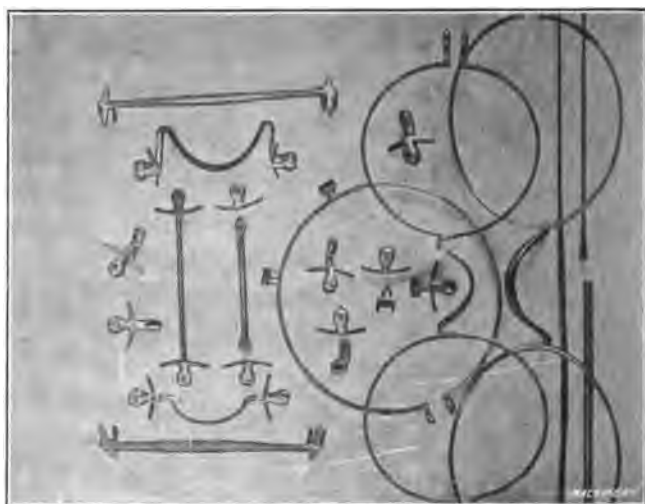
Examples of Eyeglass Parts joined by Electrical Soldering
